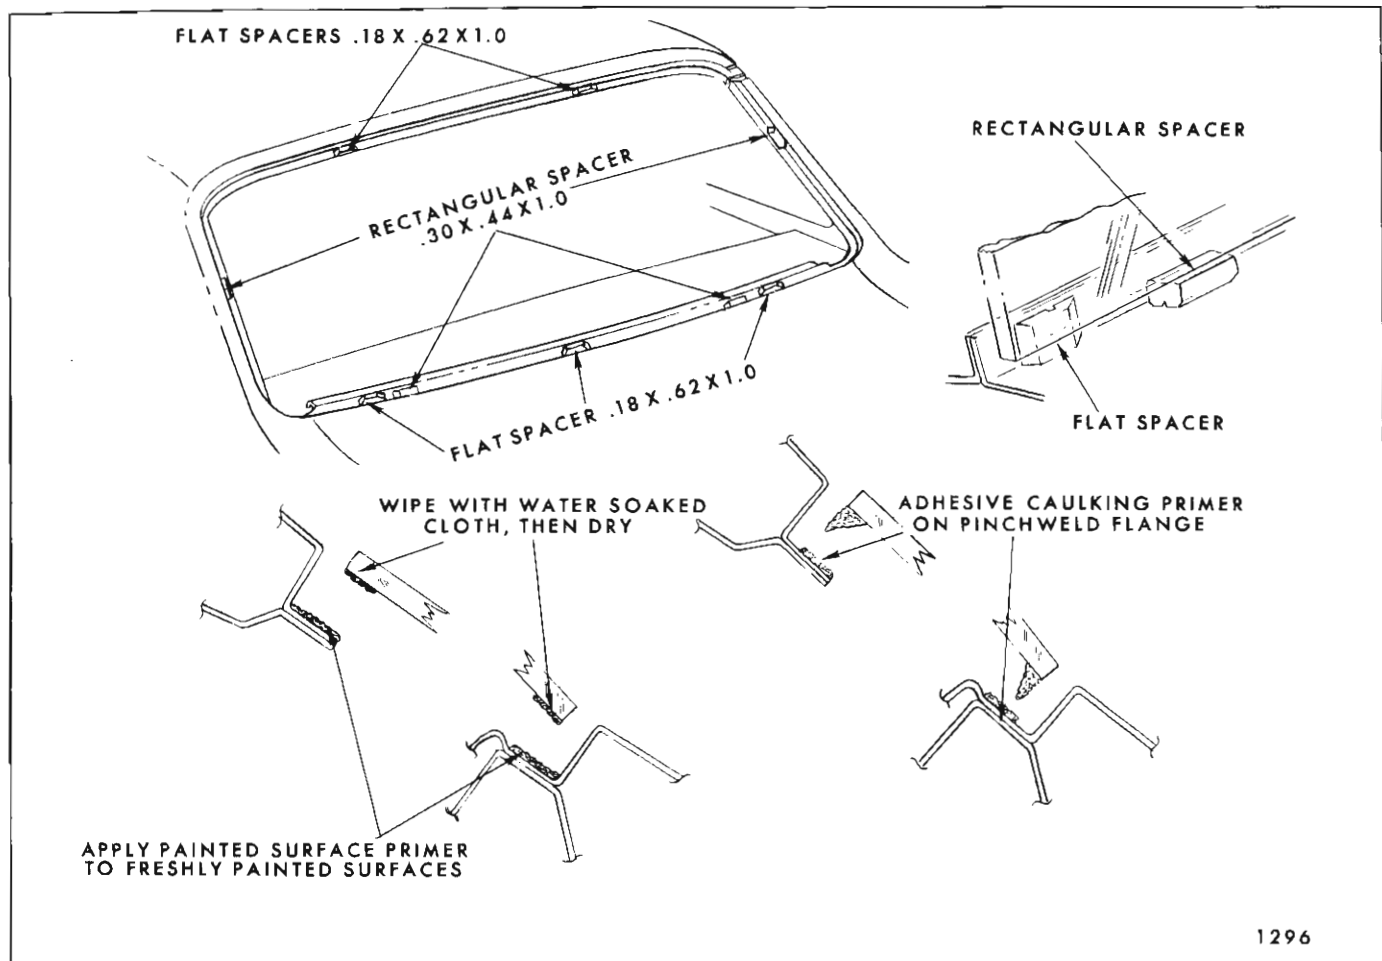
F4—Adhesive Caulked Back Window Spacer Installation
